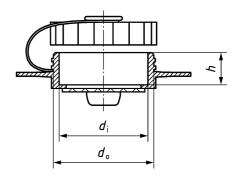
Example of a screw valve with non-return device and cap without twist lock closure
